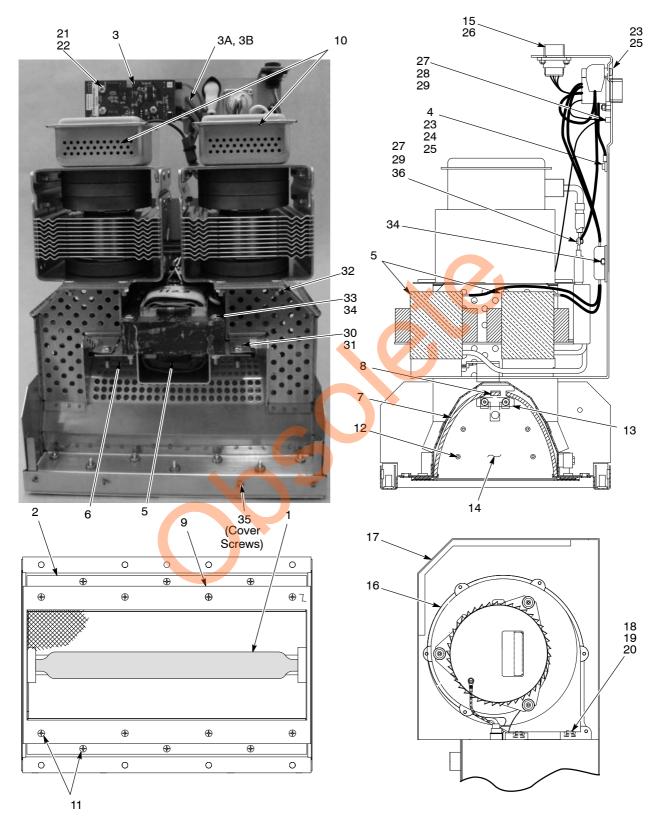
CoolWave 2 Internal Blower Lamphead (shown with cover removed)
